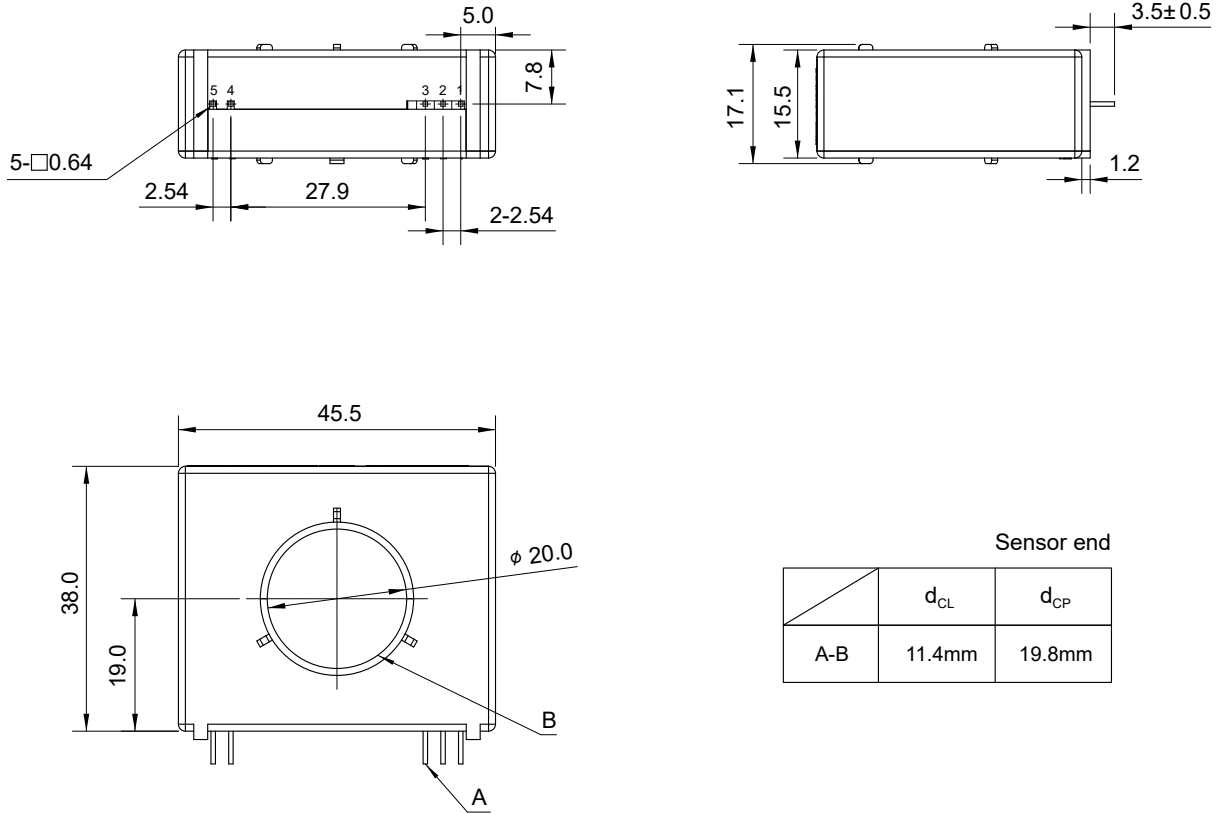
Dimension (unit: mm, tolerances for unmarked scales ±0.5 mm)
